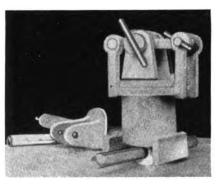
Welding Fixture for Fabricating Handle Fork for Lift Truck. This Fixture is also of Welded Construction.
